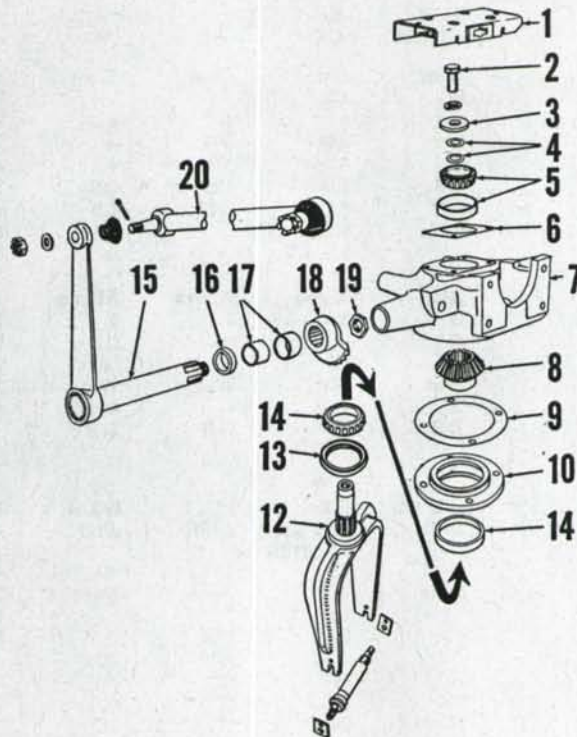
Models C and CA single wheel tricycle version front support and front steering gear assembly.
